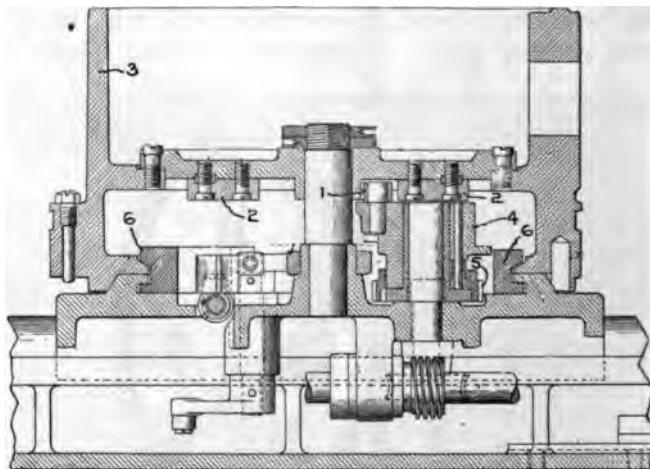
INDEXING AND CLAMPING DEVICE FOR TURRET. GISHOLT MACHINE CO.
